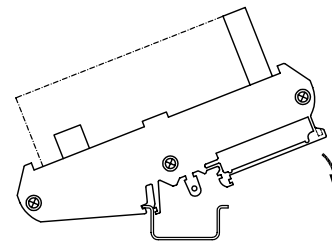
Installations instructions Termination Boards TB-XXX-..., Step 2
